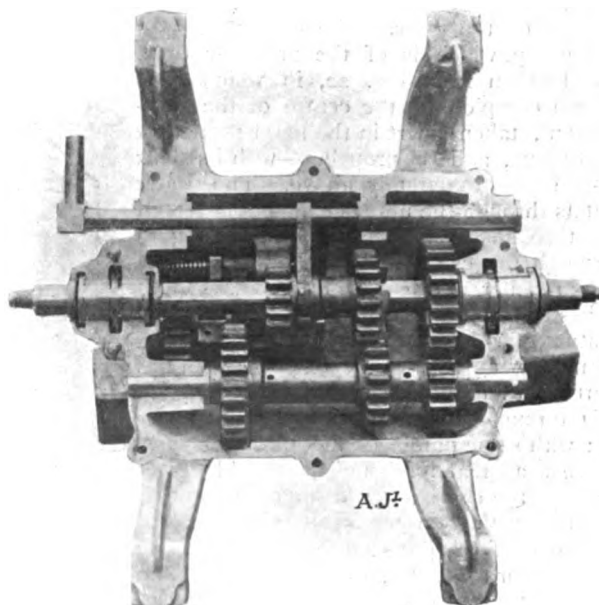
Interior view of the Swift Gear-Box; the upper portion has been taken off to show the arrangement of the Gear-Wheels.
